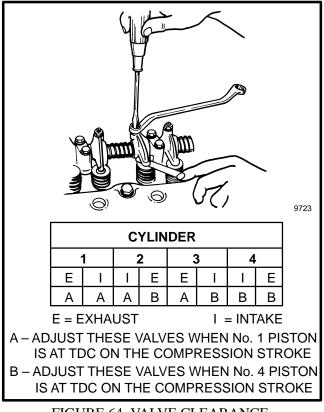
VALVE CLEARANCE ADJUSTMENT
